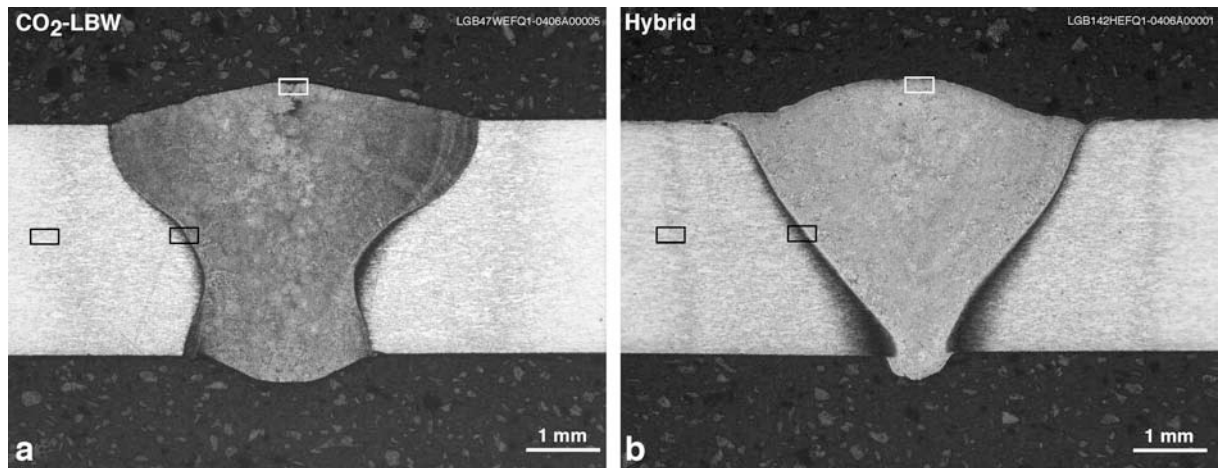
A comparison of the butt-weld in the cross-section, a) CO<sub>2</sub> laser beam weld and b) hybrid weld (section extracted purposely from an unusually small width on the back; see also Fig. 2e) in a 3.2 mm thick AA6013 sheet welded in T6. The frames mark the approximate areas shown in the following Figs. 4-6. Colour difference on either side of the weld is resulting from the difference in etching response in the heat affected zone.
